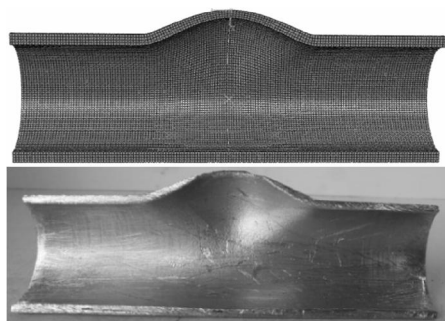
A view of the simulation and experimental test of a deformed aluminum tube (T.4)
